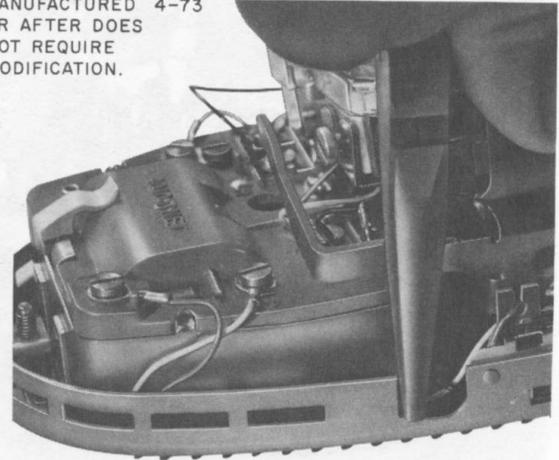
Modifying PRINCESS Telephone Set Base to Accommodate Mounting Cord Jack
